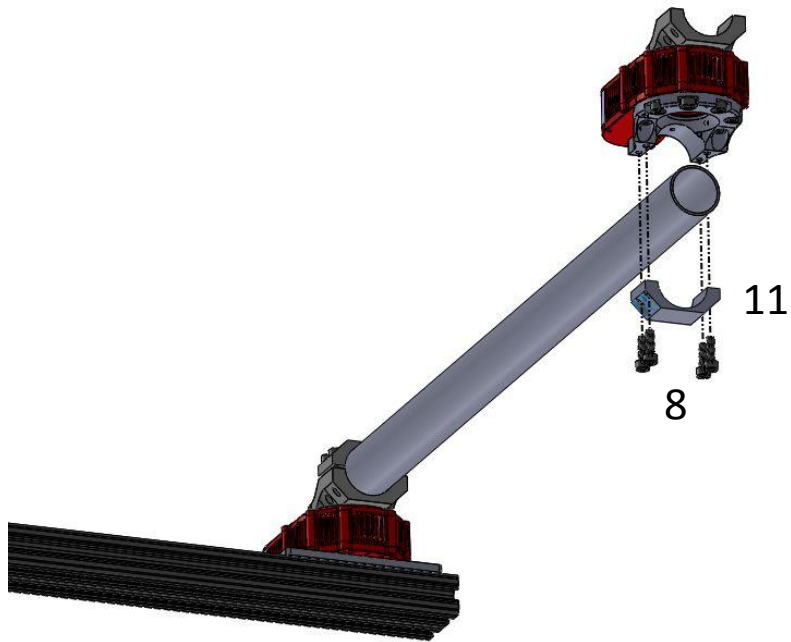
Attaching the Assembly in Fig. 6 to the Assembly in Fig. 4
